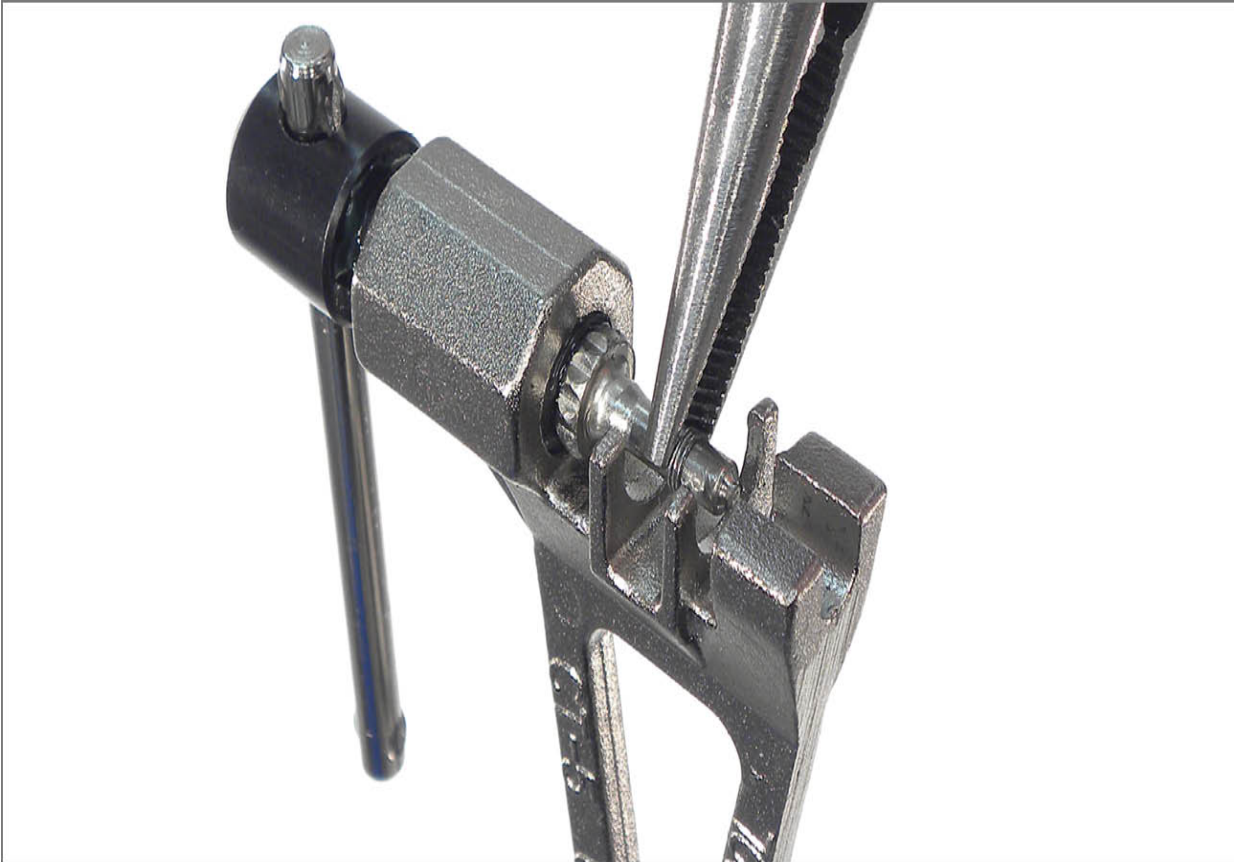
Remove old remnants of rivets from driving pin of chain tool
